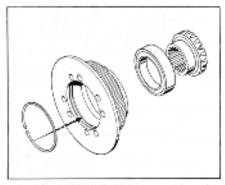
Foward Clutch Flange, Roller Bearing and Bevel Gear.
